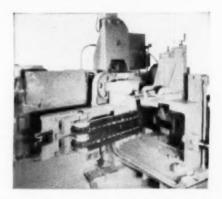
Close-Up View of Grinder Showing Power-Driven Continuous-Chain Type Feeding Fixture
